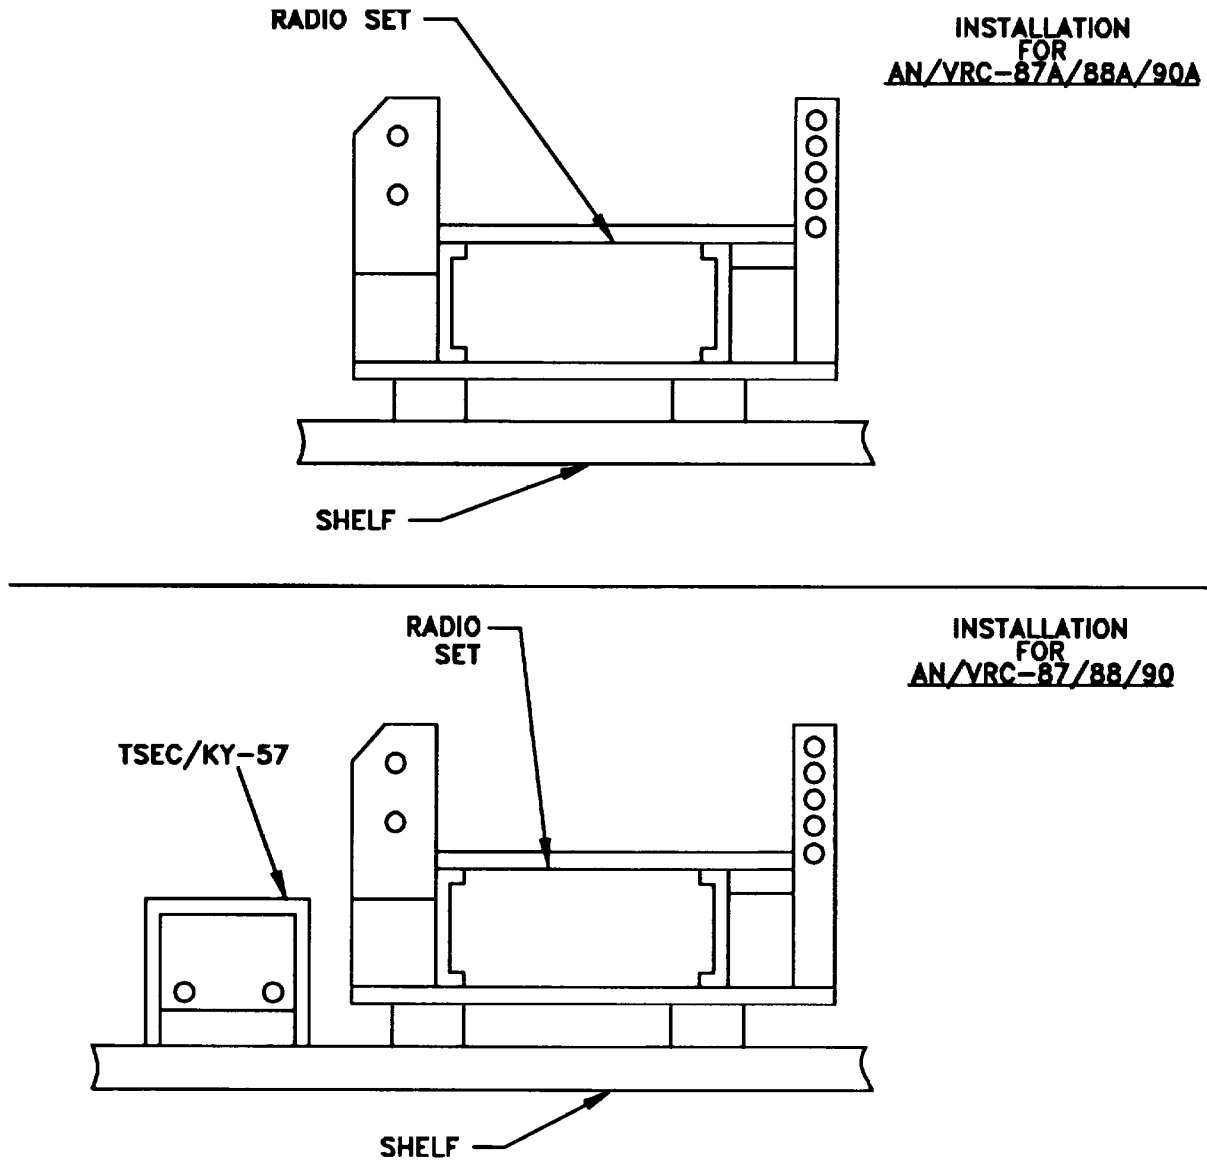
(2). MK and Radio Installation: Radio Equipment Locations.
